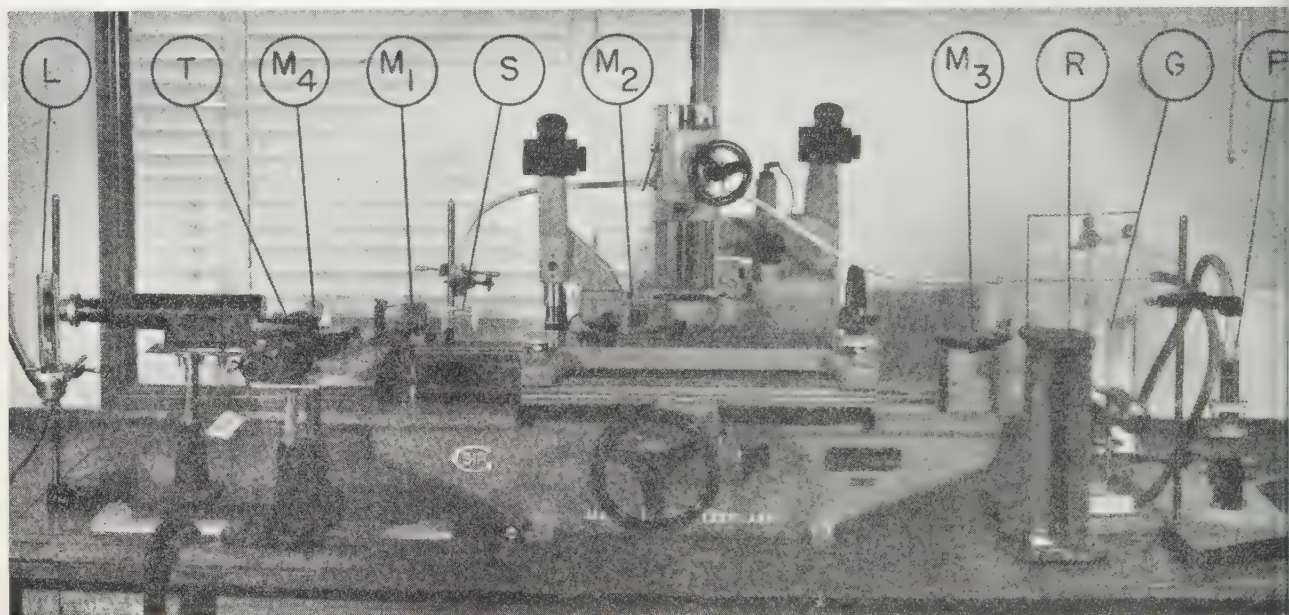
Experimental arrangement used to check the straightness of the main slide of a universal measuring machine.
